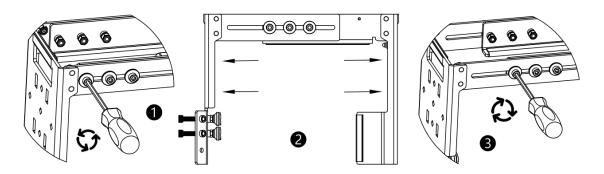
Steps to loosen, open, and lock the sliding arms for wall fitment
